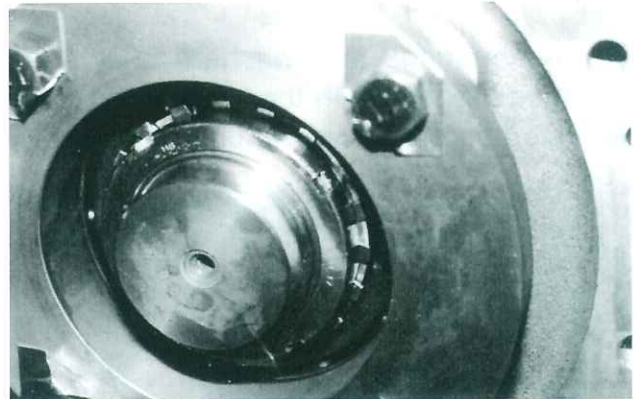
Bearing Gland Fixing Bolt Lock Washer
